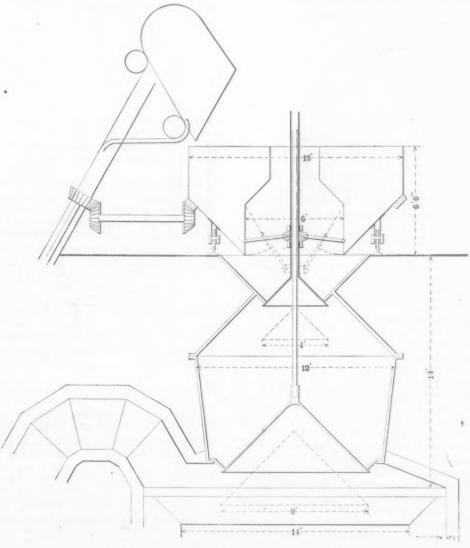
Sectional View of a Simpler Device Similar to the One in Fig. 1.
